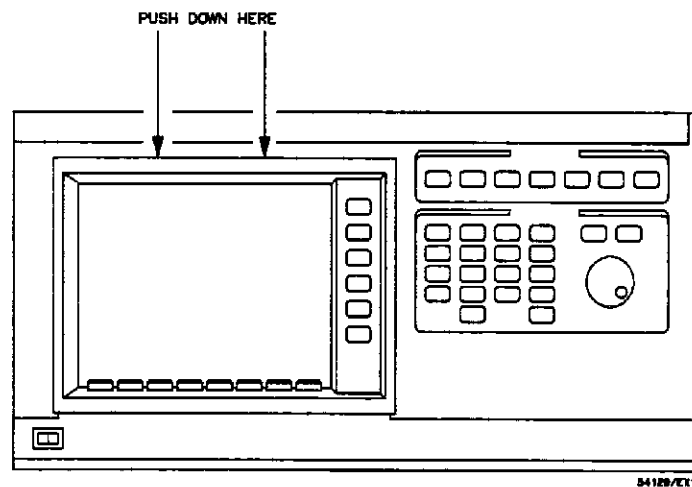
A-3. CRT Bezel Removal Pressure Locations.
